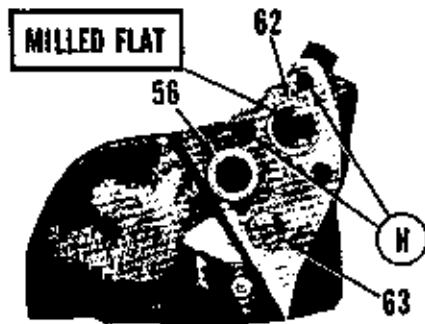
View of front (closed) end of the hydraulic lift cylinder. The milled flat on the unloading valve bushing must be installed in line with the two threaded holes (H) as shown. Also shown are the control valve bushing (56) and the check valve seat (63).
